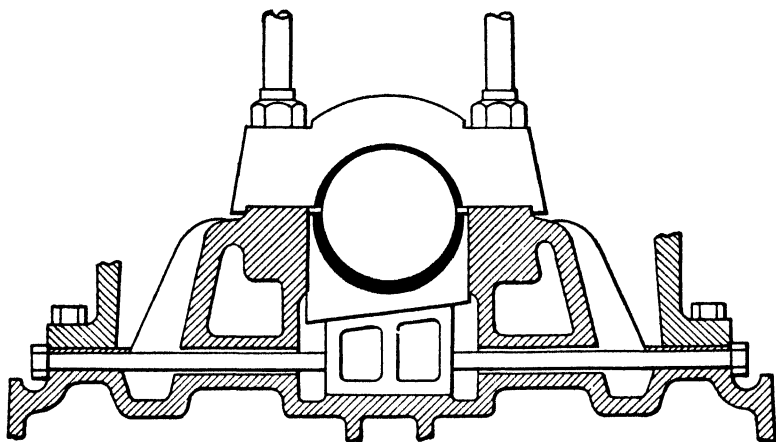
Method of Adjusting Main Bearings of Ingersoll-Rand Oil Engine
